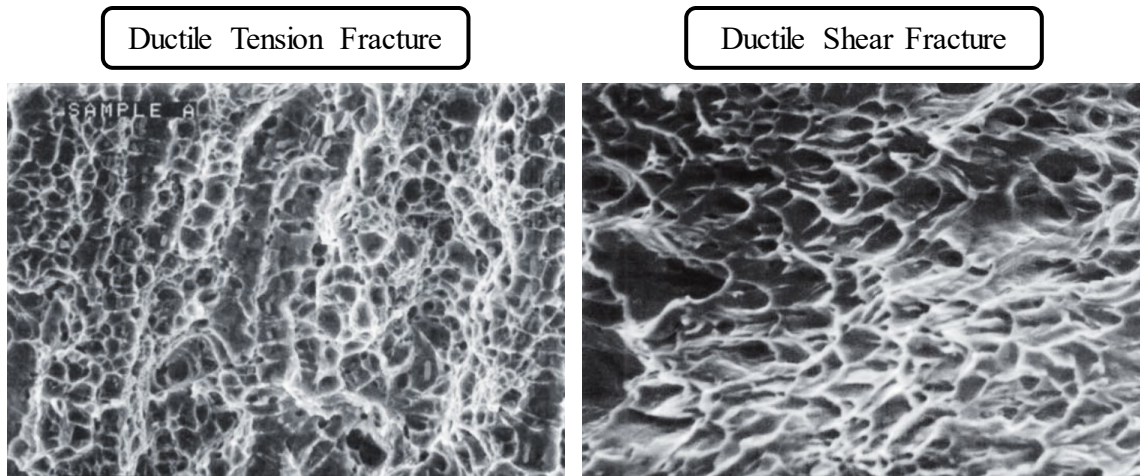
Dimpled Surfaces for Ductile Tension and Ductile Shear Fractures
